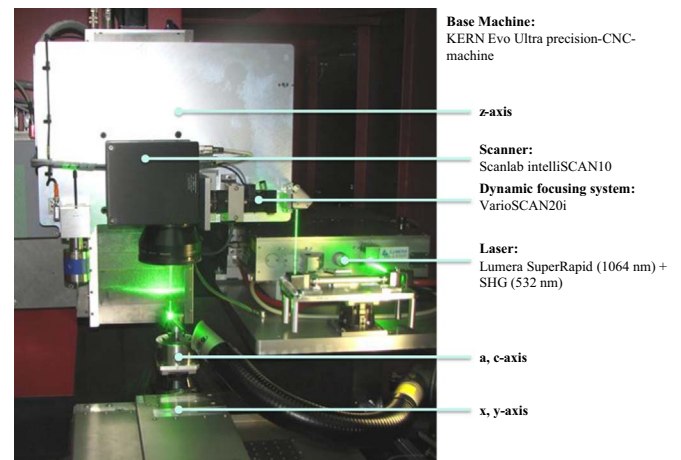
3D Laser structuring machine at Fraunhofer IPT.
